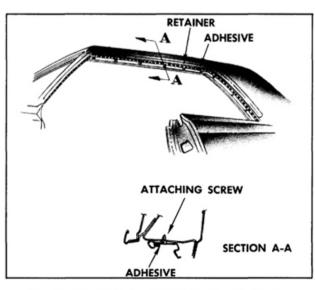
Side Roof Rail Weatherstrip Sealing
